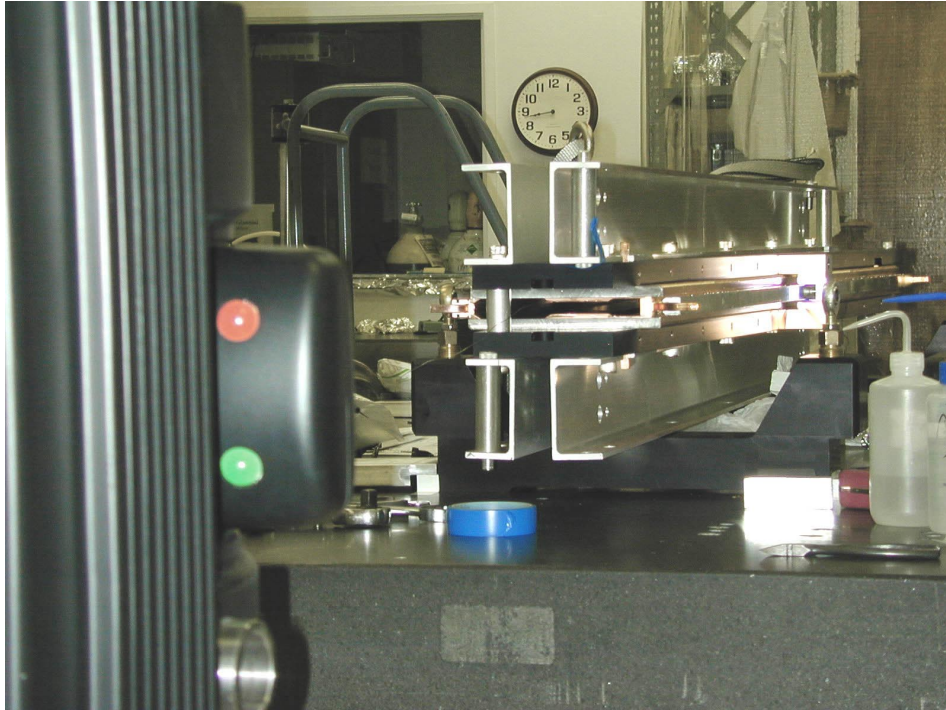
Slot profile measurement of the QFC chamber in the box weld tooling.
